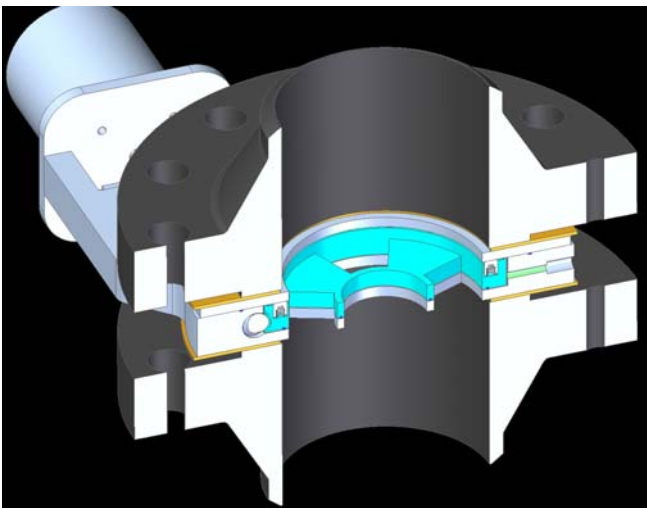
A: Flat DVO showing fixed lower ported plate held between pipe flanges and rotatable upper ported plate.
